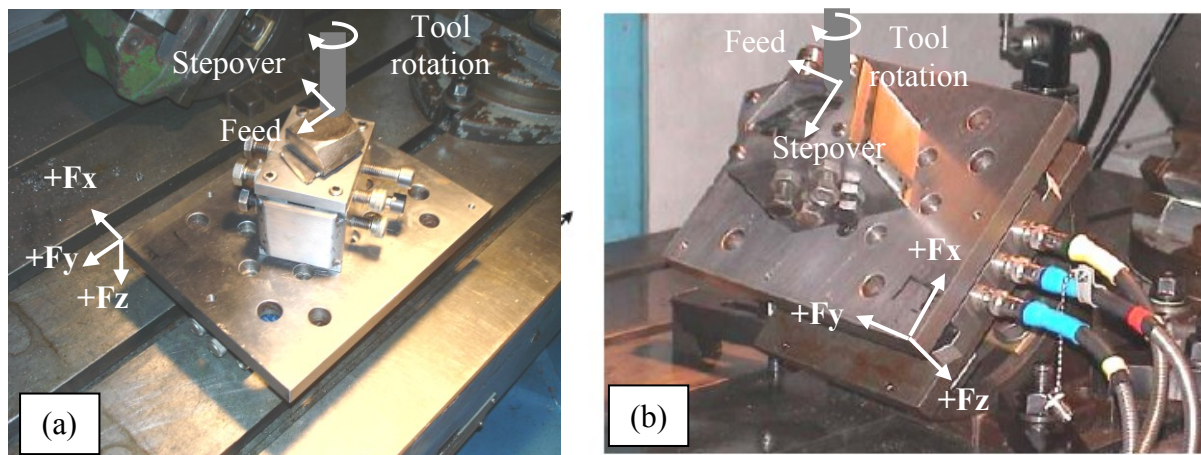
BuRTi workpiece and fixture at an angle of (a) 0°, (b) 45°
